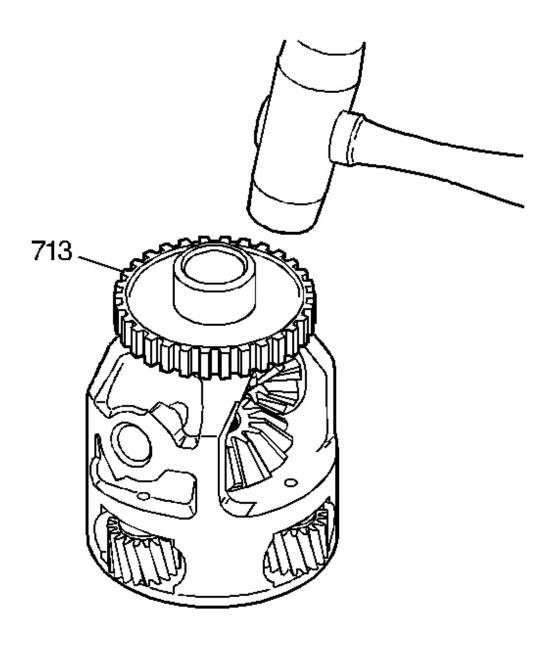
Installing Vehicle Speed Sensor Reluctor Wheel
